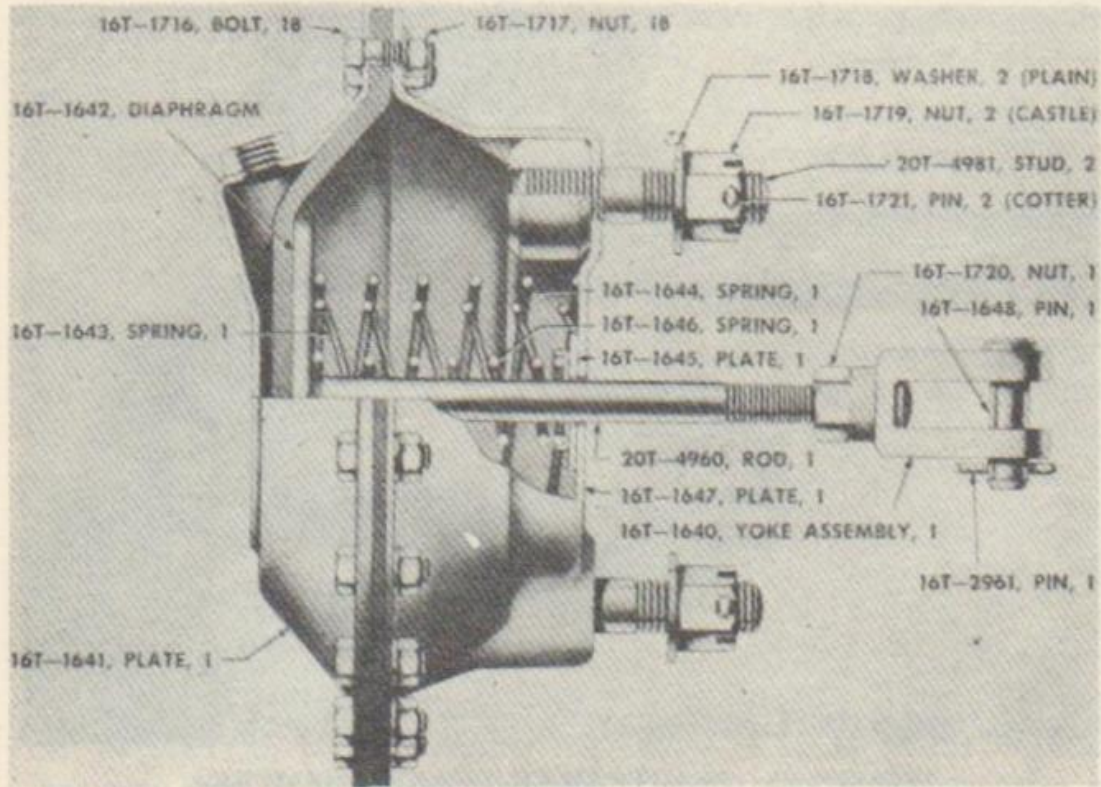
DOLLY BRAKE CHAMBER—SECTIONAL VIEW
